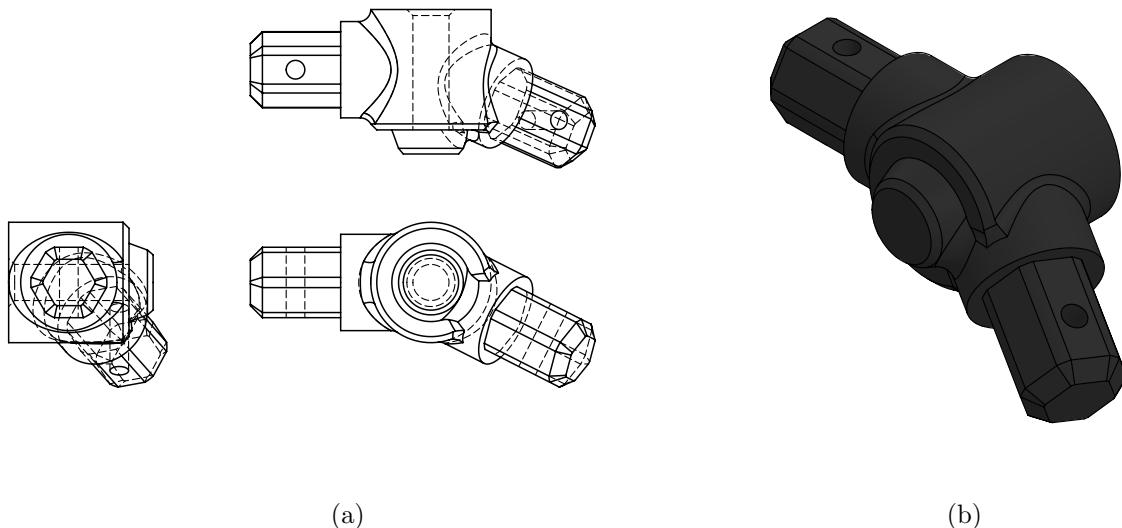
Detailed drawings of the fixed bogie joint component for one side of the suspension system
